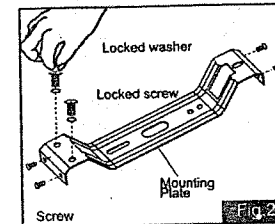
Unscrew the locked screws, locked washers and screws from mounting plate.
